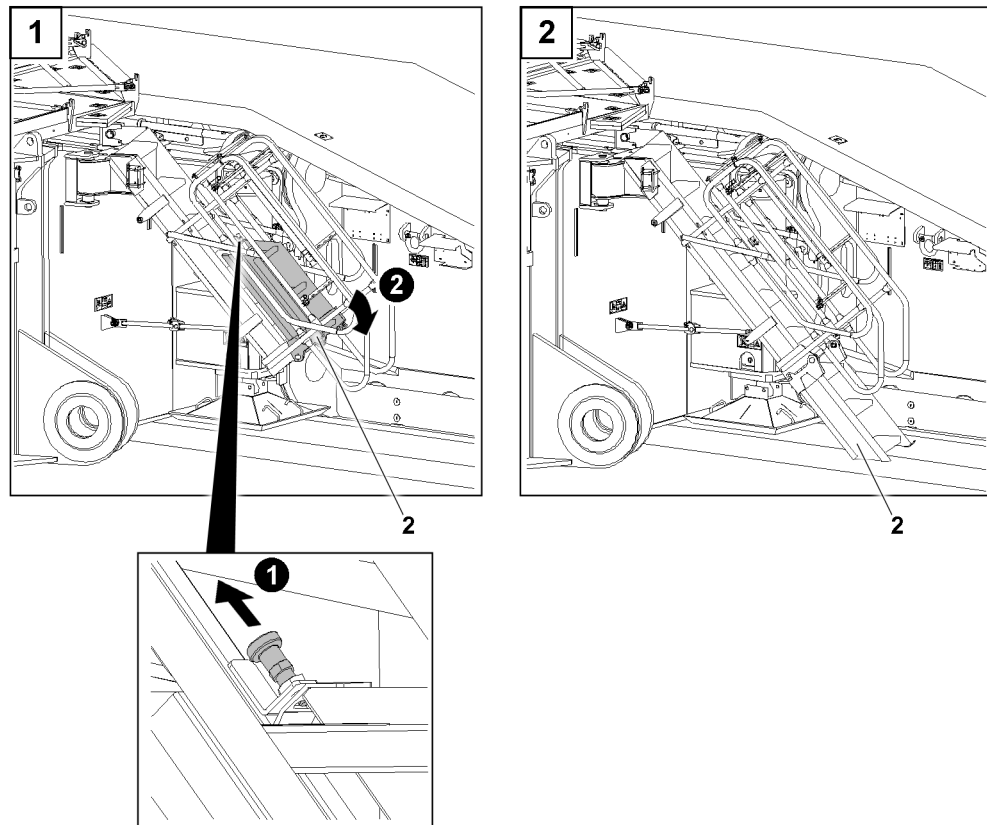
Assembling the stairs in the operating position — folding the lower section of the ladder into the operating position
